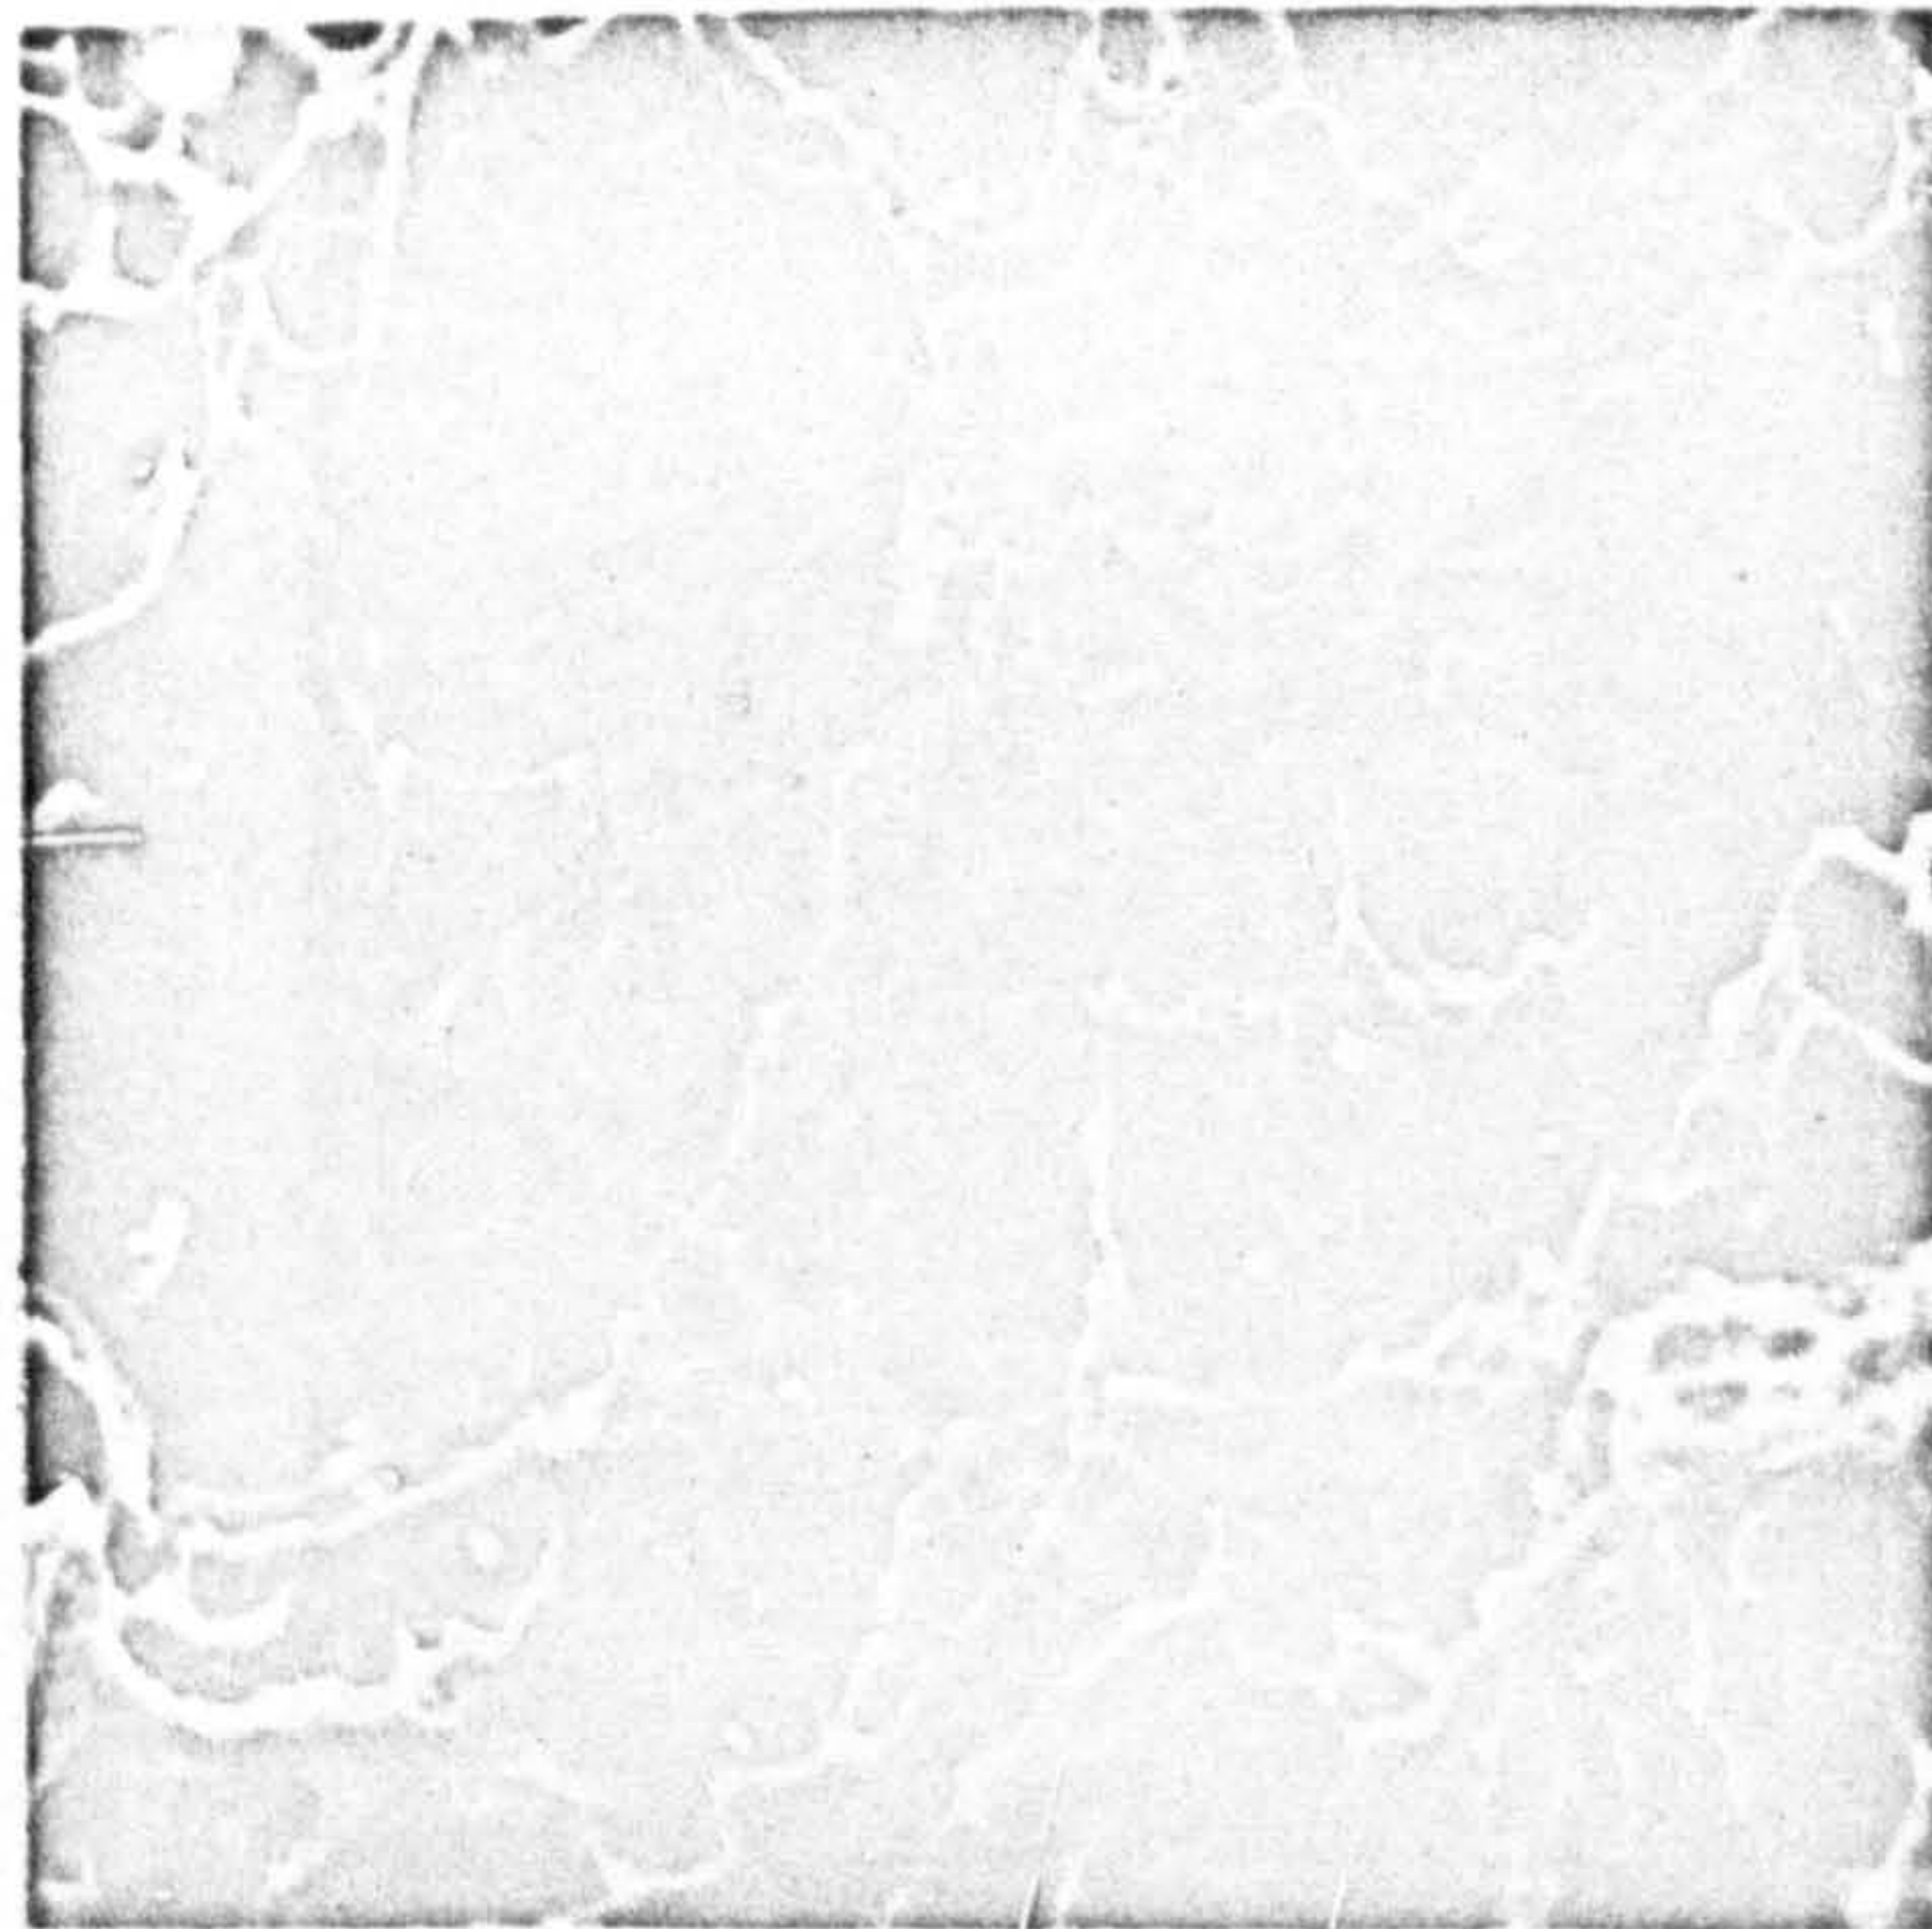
Alloy A As-Forged Fractured 25°C x675
